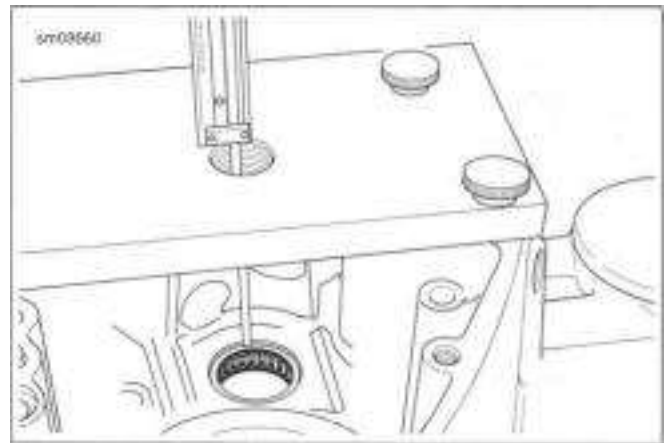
Remove Camshaft Needle Bearing Install
